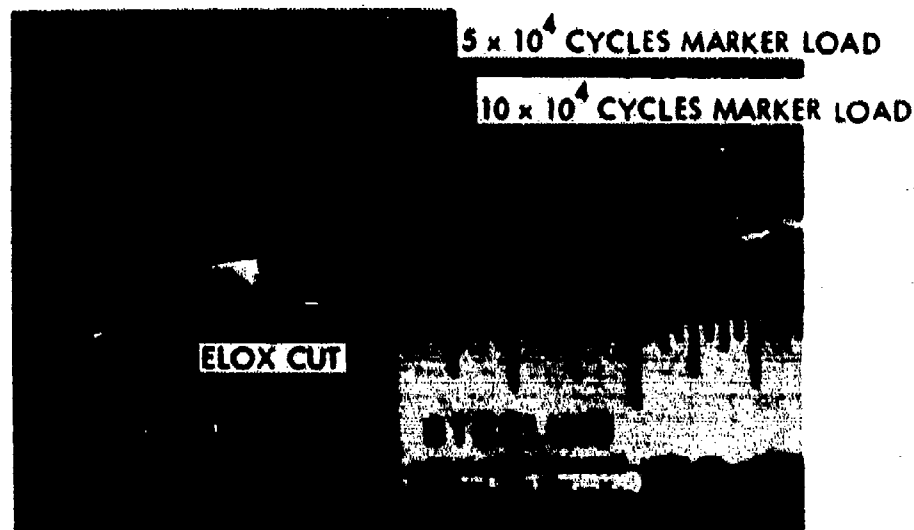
Fracture Surface of Test Specimen No. 1
